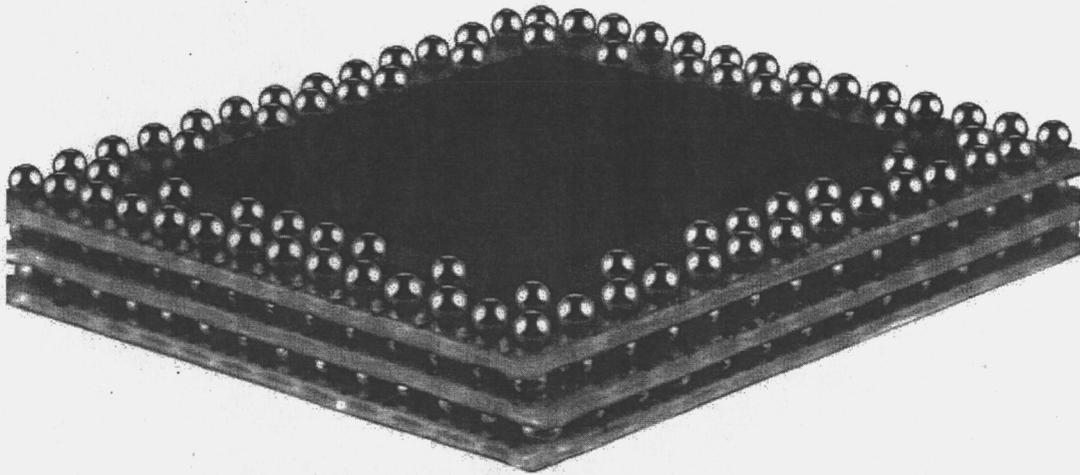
Stacked etCSP™ Isometric Side View. (Courtesy of Amkor)
